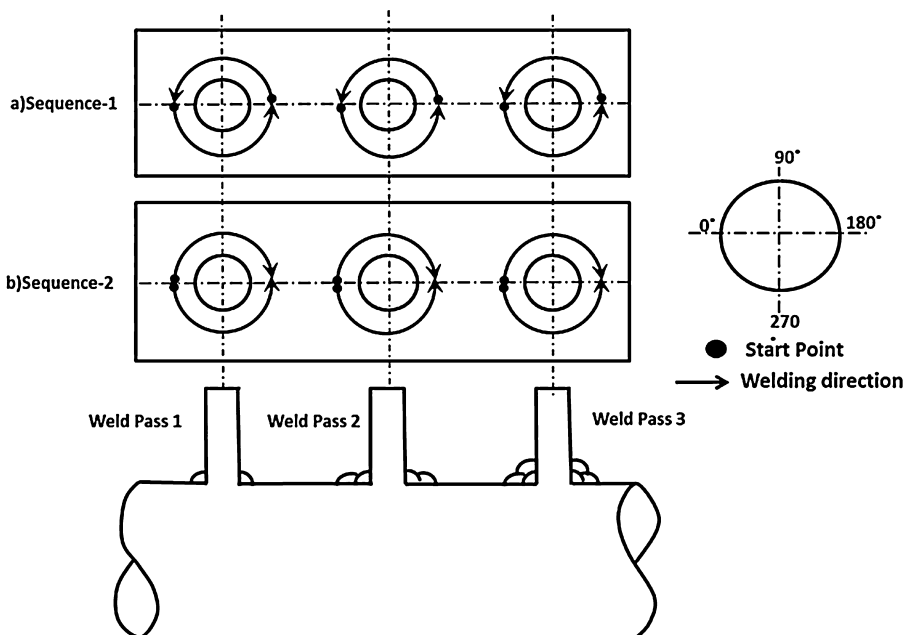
Schematic view of two welding sequences between nipple and header.
